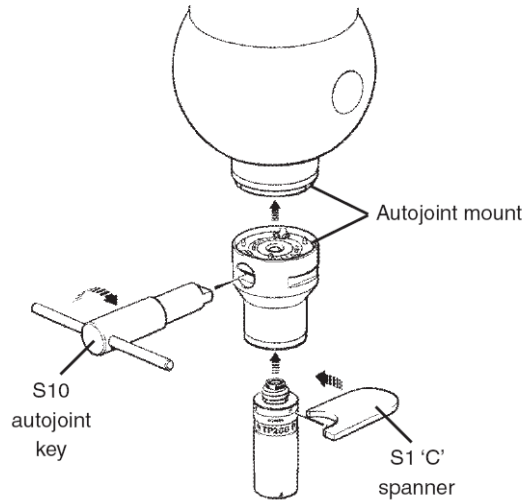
Fitting the TP200 probe sensor to a probe head with an autojoint
